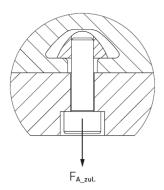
Mounting with T nuts - HM040S, HM060S, HM080S
